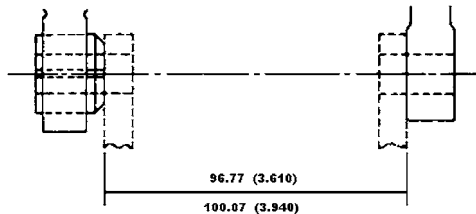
TYPICAL INSTALLATION OF SPLIT BUSHING IN HINGE MOUNTING LUG
